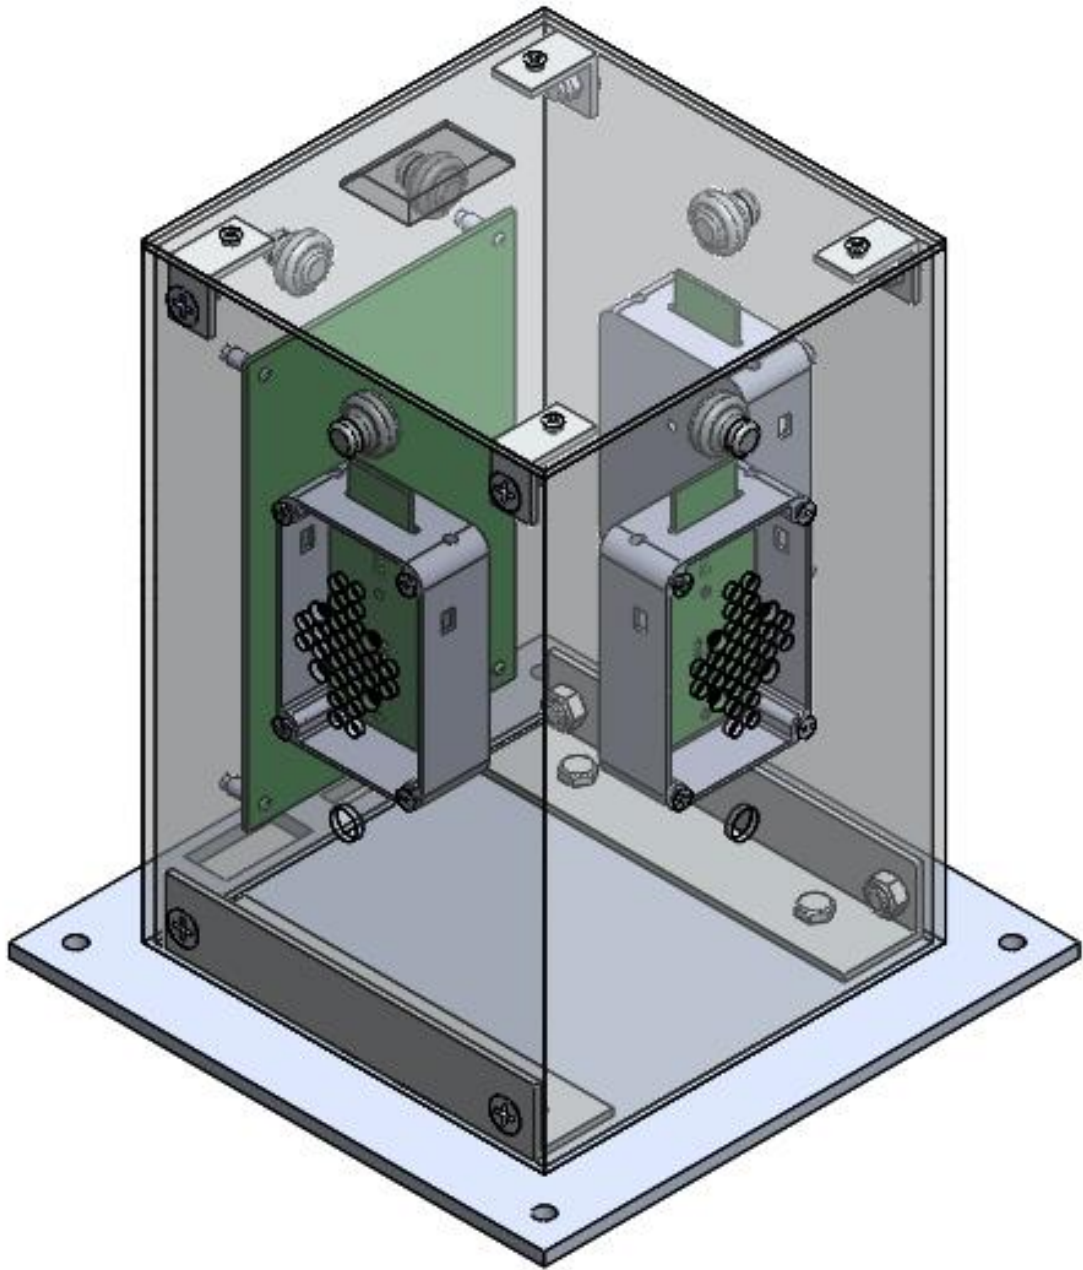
(o) Design of all sides view of the payload mounted on the HASP plate.
